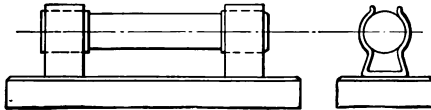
Enclosed Fuse with Ferrule Contact.
